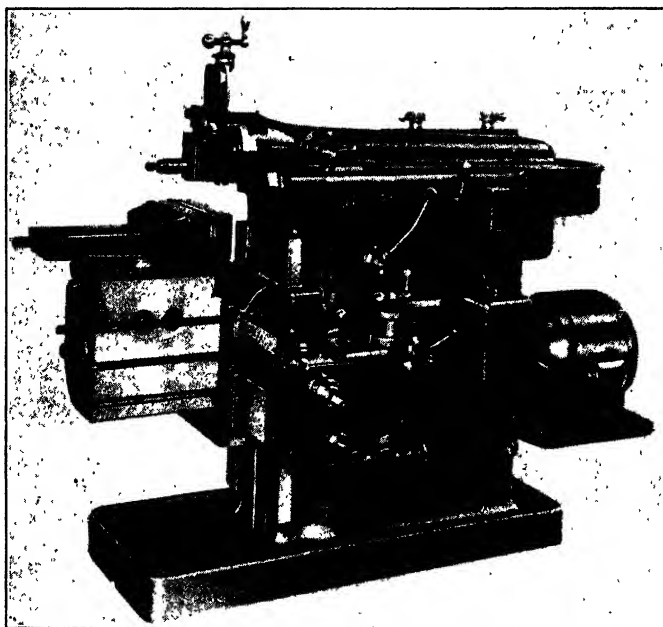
Shaper. (Courtesy Rockford Machine Tool Co.)
